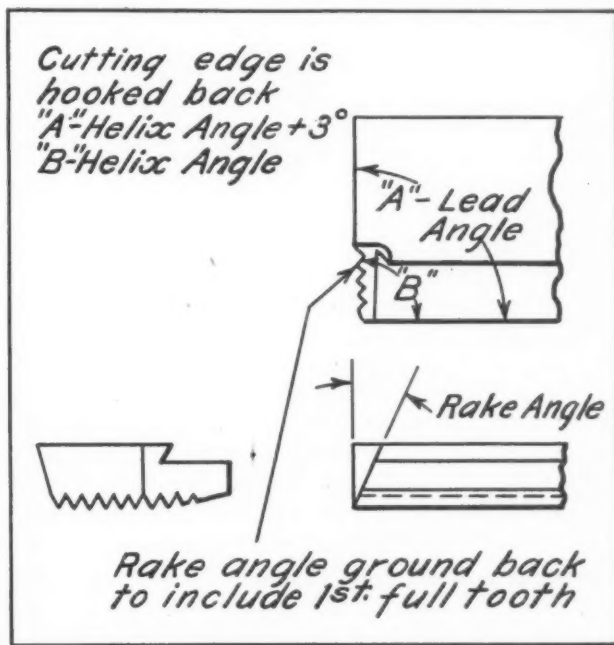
Chaser with Hooked Form of Grind Set at Helix Angle, as in Fig. 2, for Cutting Standard or Special Threads on Work of Non-standard Diameter
